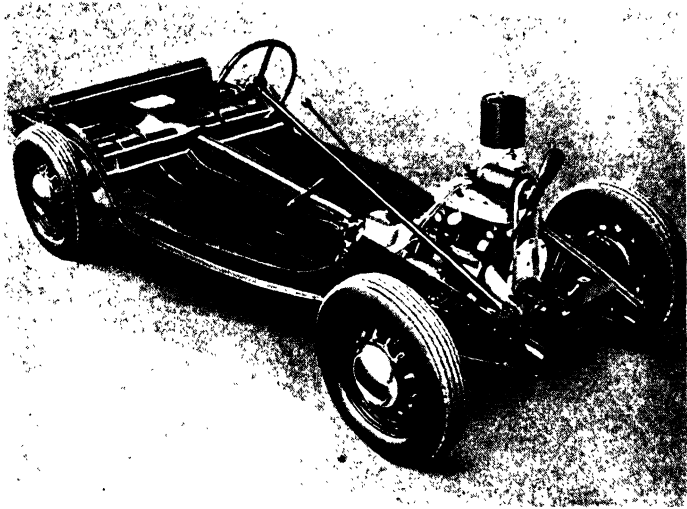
"PLATFORM" FRAME OF THE AUSTIN EIGHT, TO WHICH THE BODY IS SECURED BY A NUMBER OF BOLTS, FORMING BOX-SECTION SILLS
